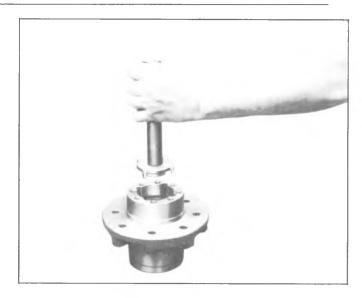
B-33-Removing Outer Bearing and Cup *Inspection and Cleaning of Bearings
